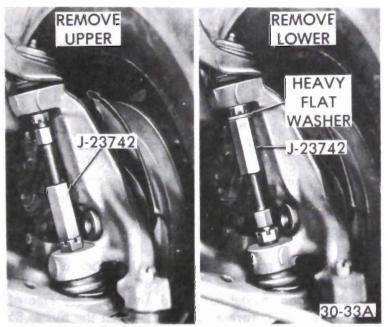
Separating Steering Knuckle from Upper Ball Joint
